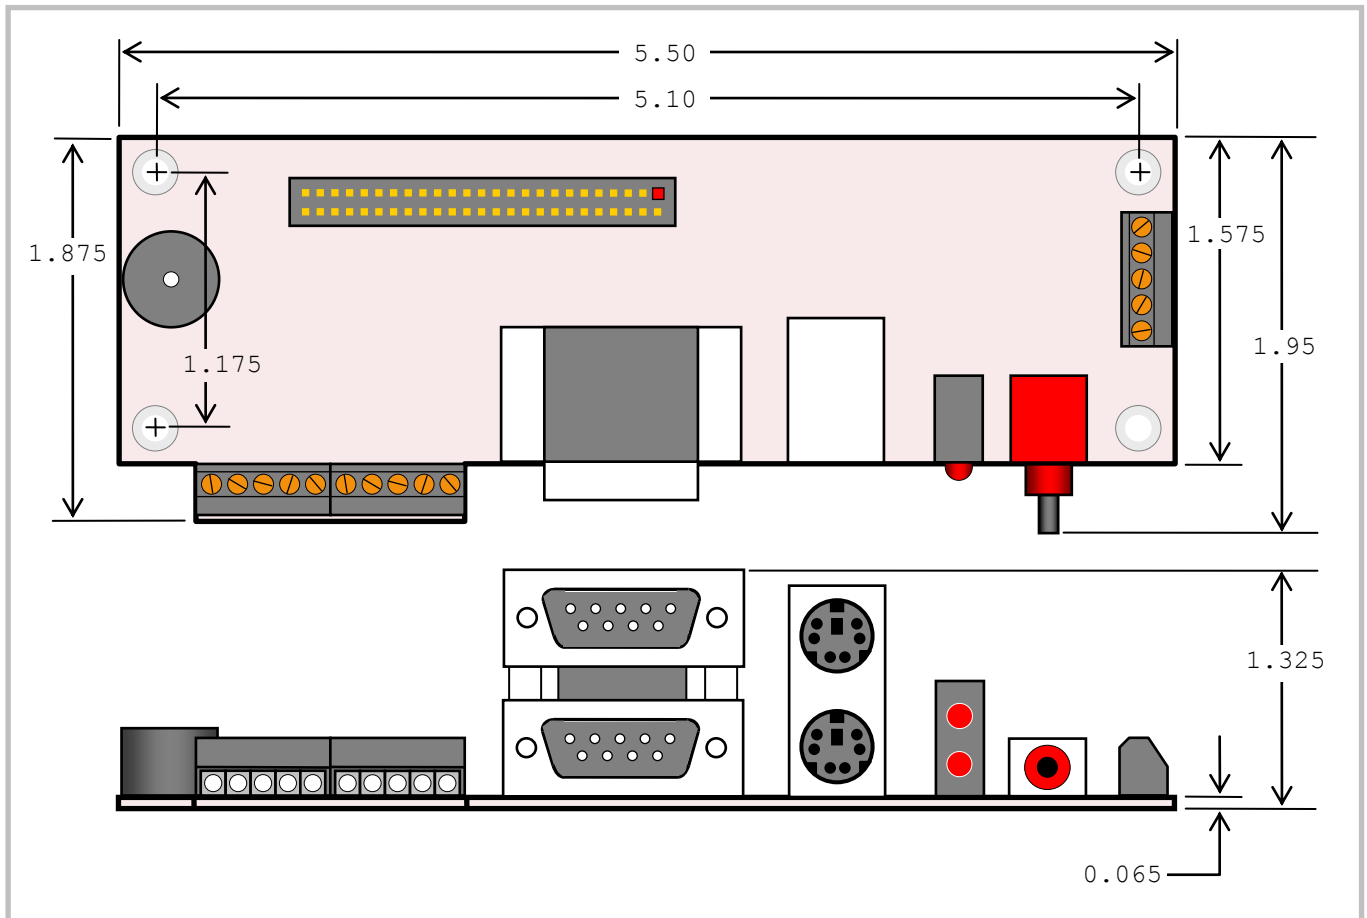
VL-CBR-5009 Dimensions and Mounting Holes
